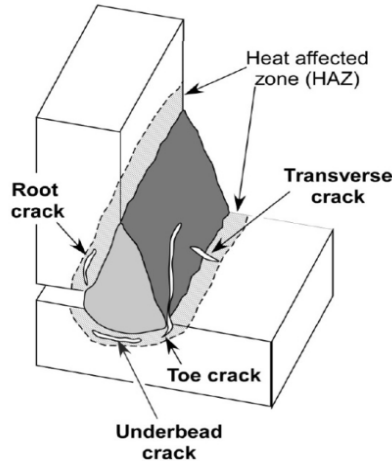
Crack directions and positions in a fillet welded joint [1.6]
